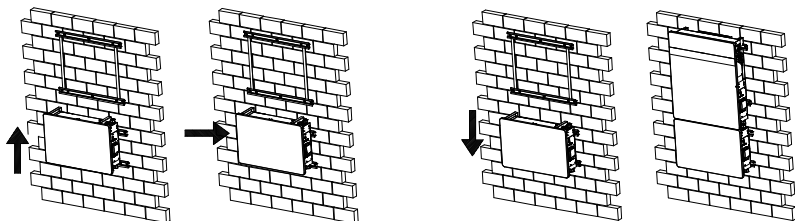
Install the AS1-3KS-5.1 on wall mounting bracket
